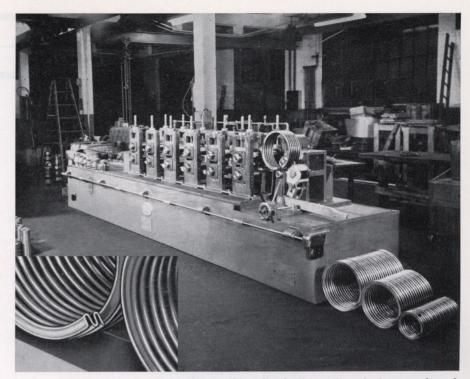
Continuous-roll-forming machine fitted with coiling device at exit end. Inset shows cross section through work produced. Note this setup employs six forming stations plus the coiler. Latter can be adjusted to produce diameter desired.
